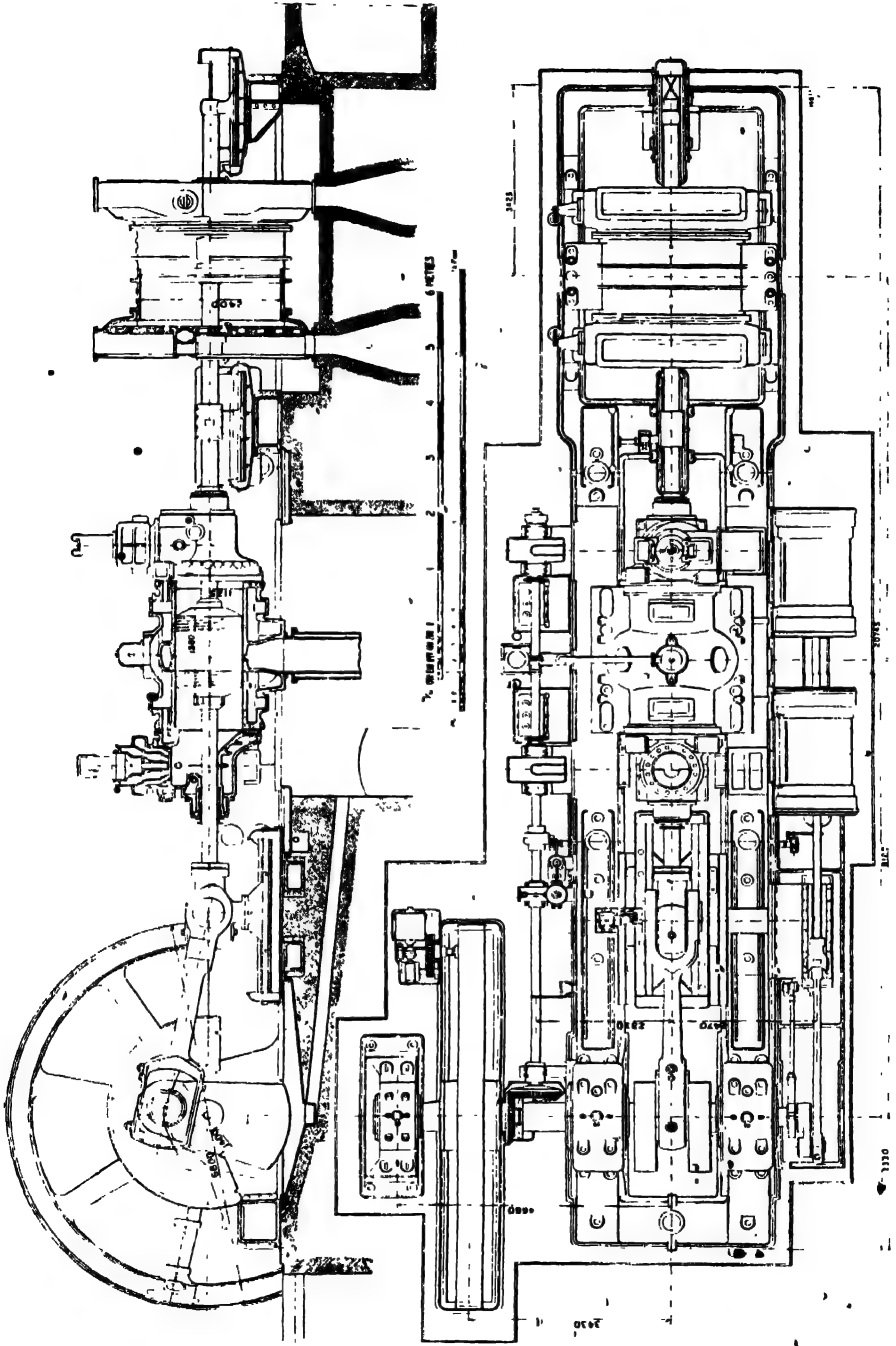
2000 Horse-power Single-cylinder Gas Blowing Engine by the Siegner Maschinenbau
